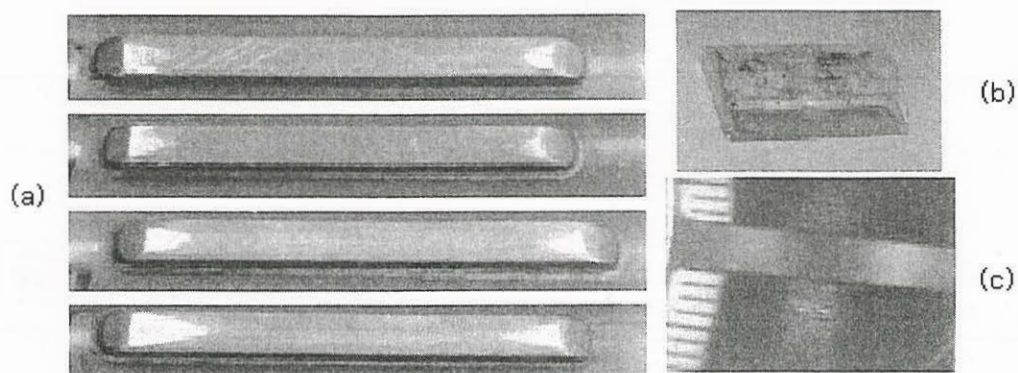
Fretting wears on bearing pads and inner surface of the pressure tube
